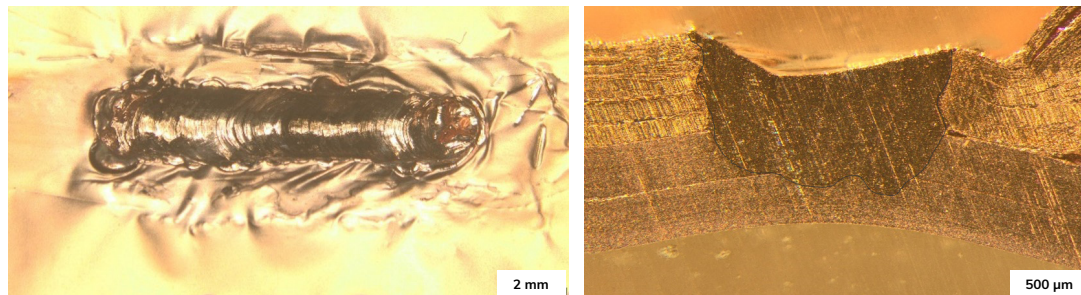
Welding one hundred 6-micrometer battery foils to a 2 x 0.5-millimeter copper tab: a large, pore-free bonding surface and a smooth top bead with minimal spatter formation.
